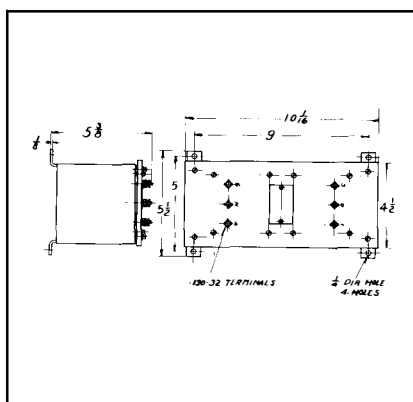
Outline Dimensions and Drilling Plan for Phase Shifting Transformer used with 3-phase, 4-wire Var-meter.
